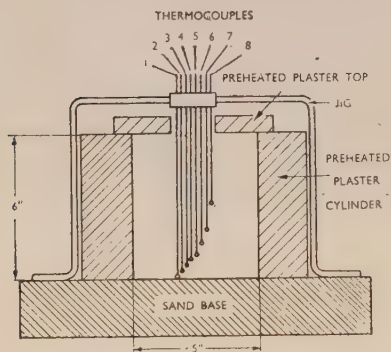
Details of Mould and Positions of Thermocouples in 5 in. dia. \times 6 in. Cylinder Casting. Thermocouples were arranged round the circumference of a $1\frac{1}{4}$ in. dia. cylinder concentric with the axis of the casting.
